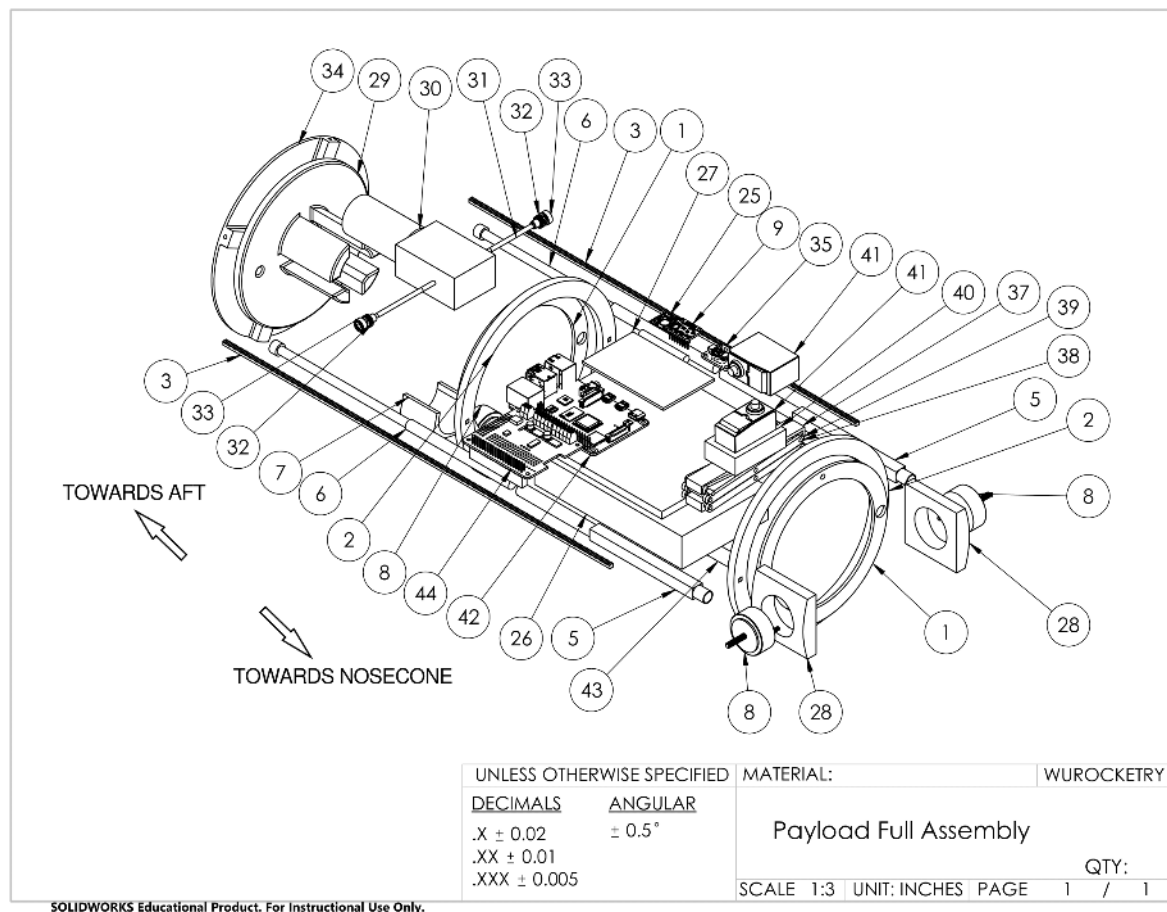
Exploded View of Payload Full Assembly with BoM Callouts (listed in Fig. 91)
